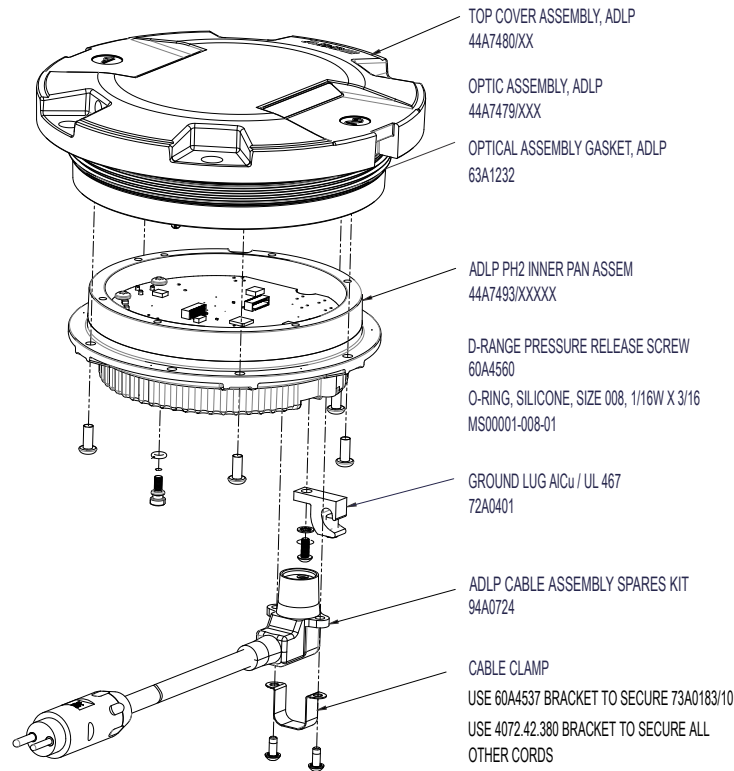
8" DRC or DTZ Light Fixture Assembly
